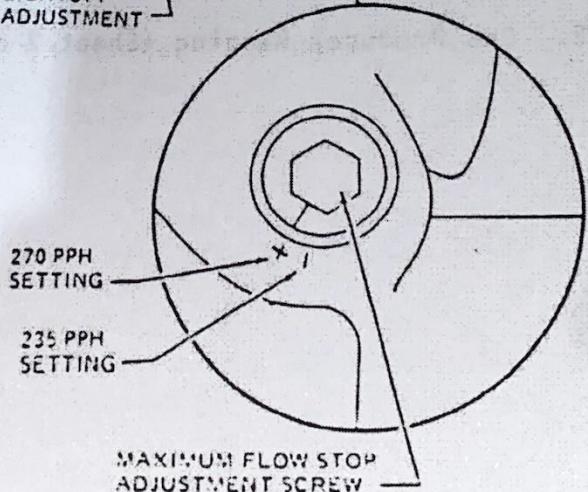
CECO MC-40 Gas Producer Fuel Control - Model 250-C20 Engine
